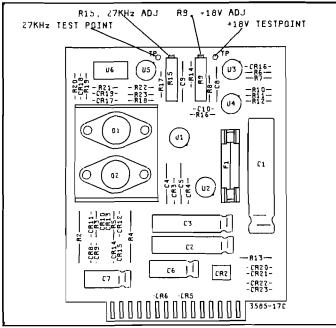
Power Supply Control Board, A17 (Rev C).
